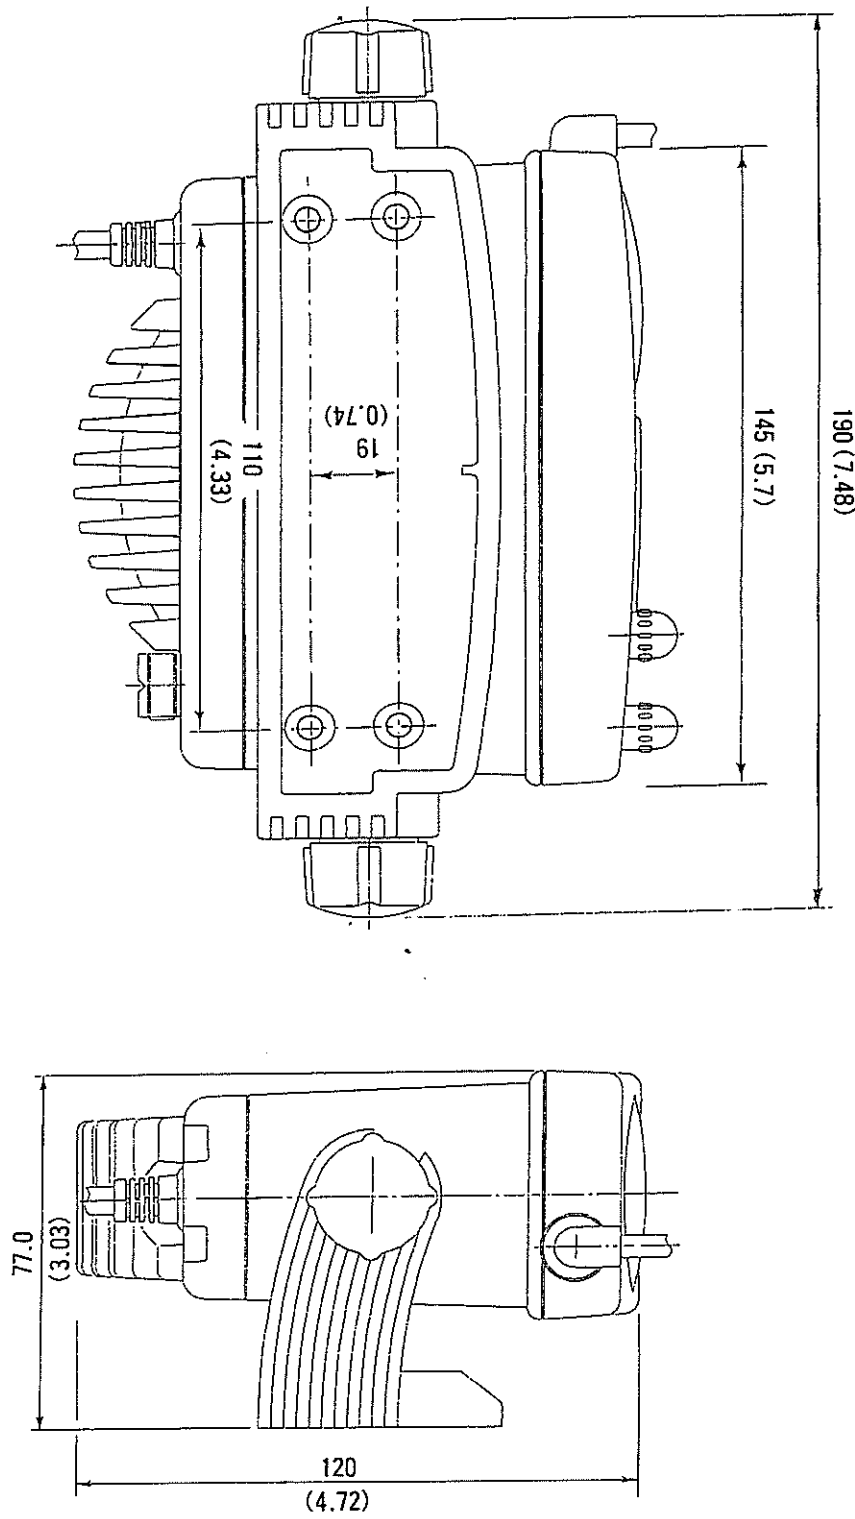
OUTLINE AND MOUNTING DIMENSIONS
